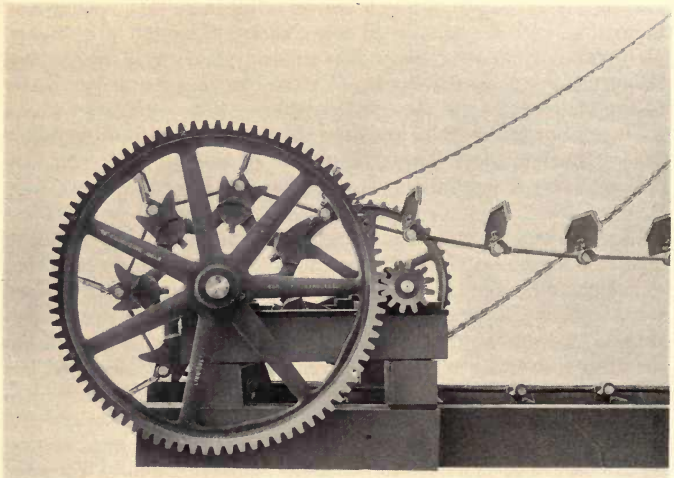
Equalizing Gear for Long Pitch Conveyor Chain extensively used
